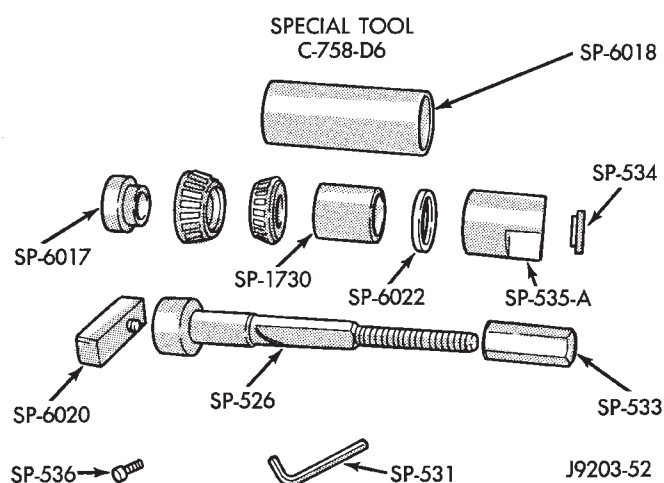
9 1/4 Axle Pinion Adjustment Tools
